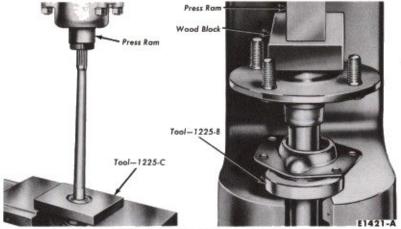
Rear Wheel Bearing Removal and Installation—Comet
